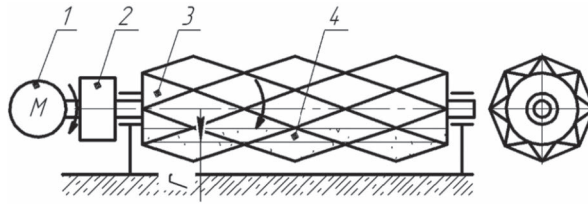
Diagram of a drum mixer with working surfaces tilted at different angles: (1) electric motor; (2) gearbox; (3) drum; (4) processed material.
